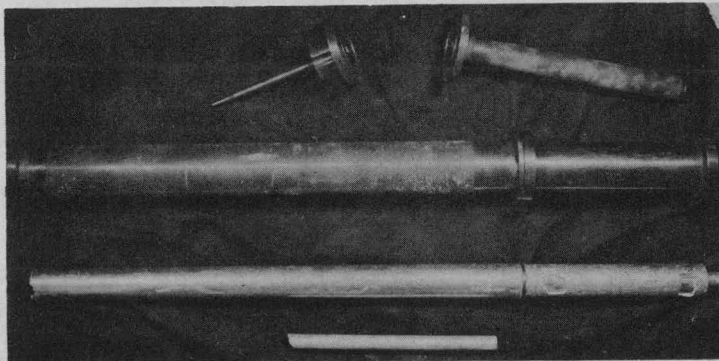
MOLD-RESERVOIR PARTS AND FIRST CASTING. EMBEDDED TOP SPIDER IS SEEN IN CASTING.
